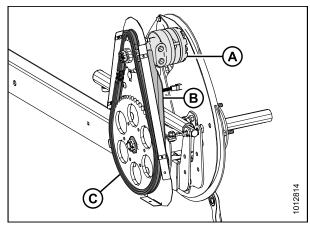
Single-Reel Drive Shown – Double Reel Similar
